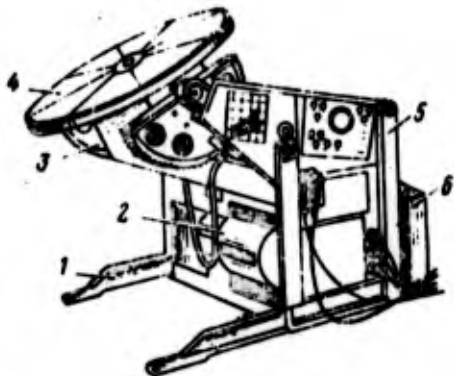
Manipulator for welding works: 1 - bed; 2 - cantilever; 3 - table cantilever; 4 - face plate; 5 - support frame; 6 - electric equipment.
